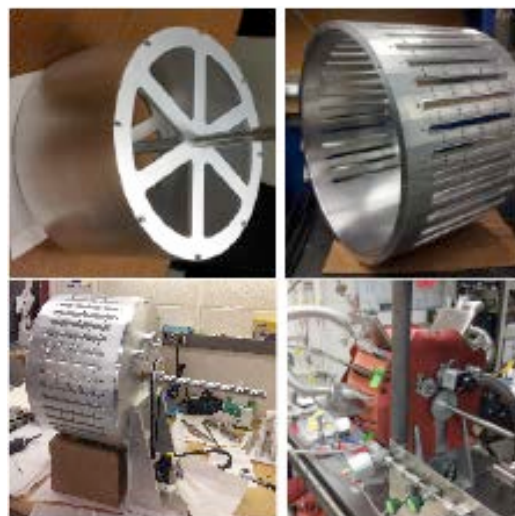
Fabricated and final assembly of drum-in-drum in-line reactor
